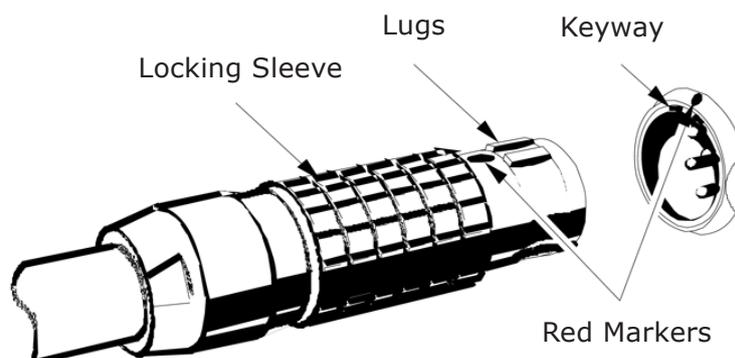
Connecting the 6-way plug to the RT8B Thermometer
